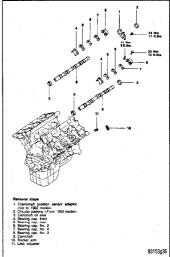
Camshaft, rocker arm and shaft assemblies—3.0L DOHC engine
